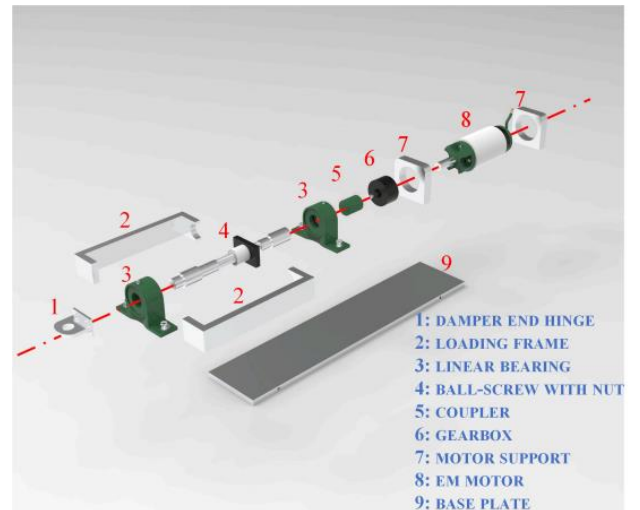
Exploded view drawing of the proposed rotary type setup (EMD)
